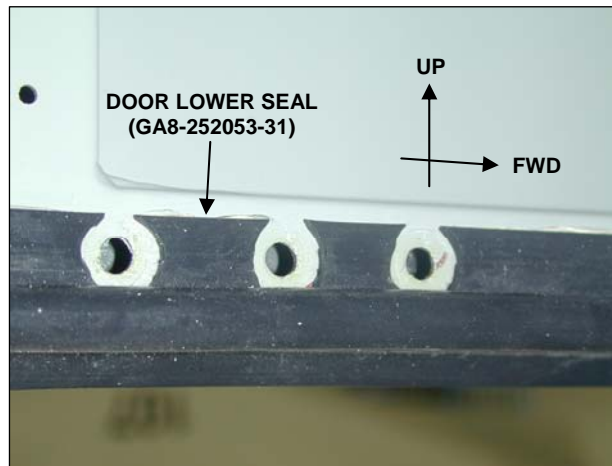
Holes in the leg of the seal around the holes in the door frame for installing the lower door slide mount.
